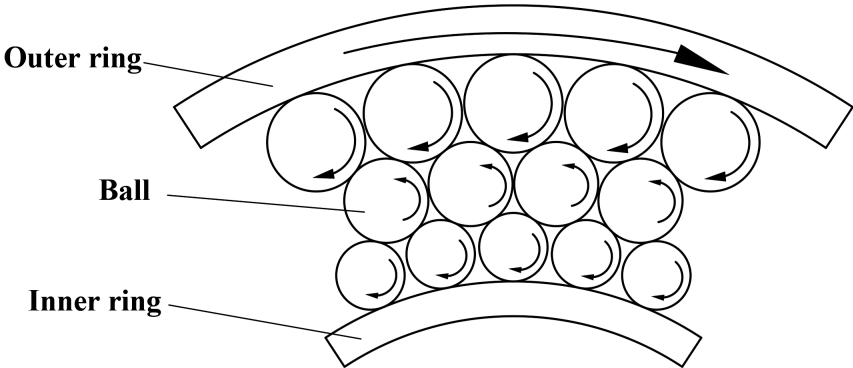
Rolling bearing with triple rollers CN103062216A.
